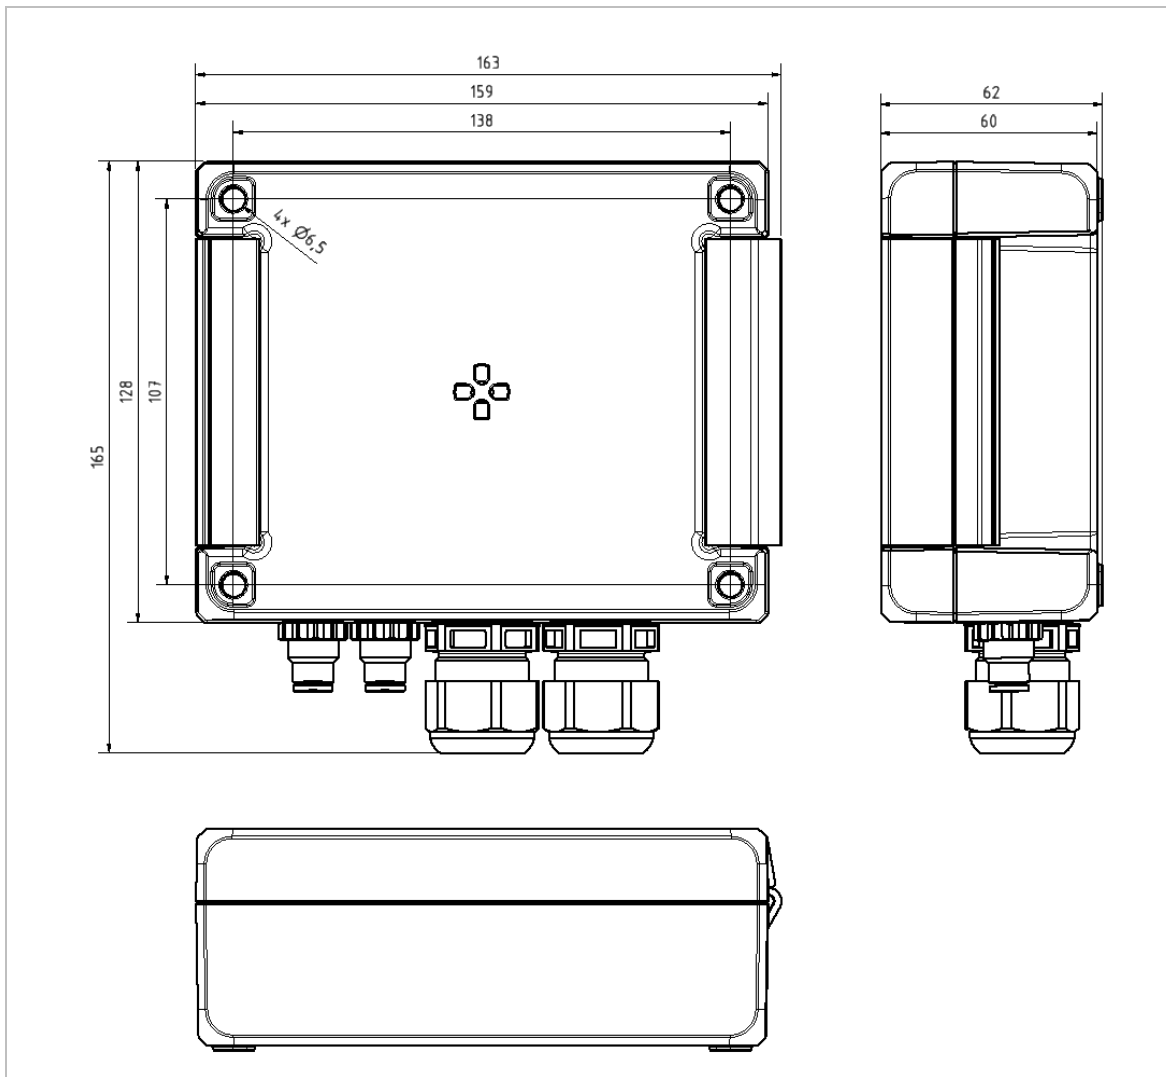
Dimensions HE 5422 HD (die-cast aluminium housing)
